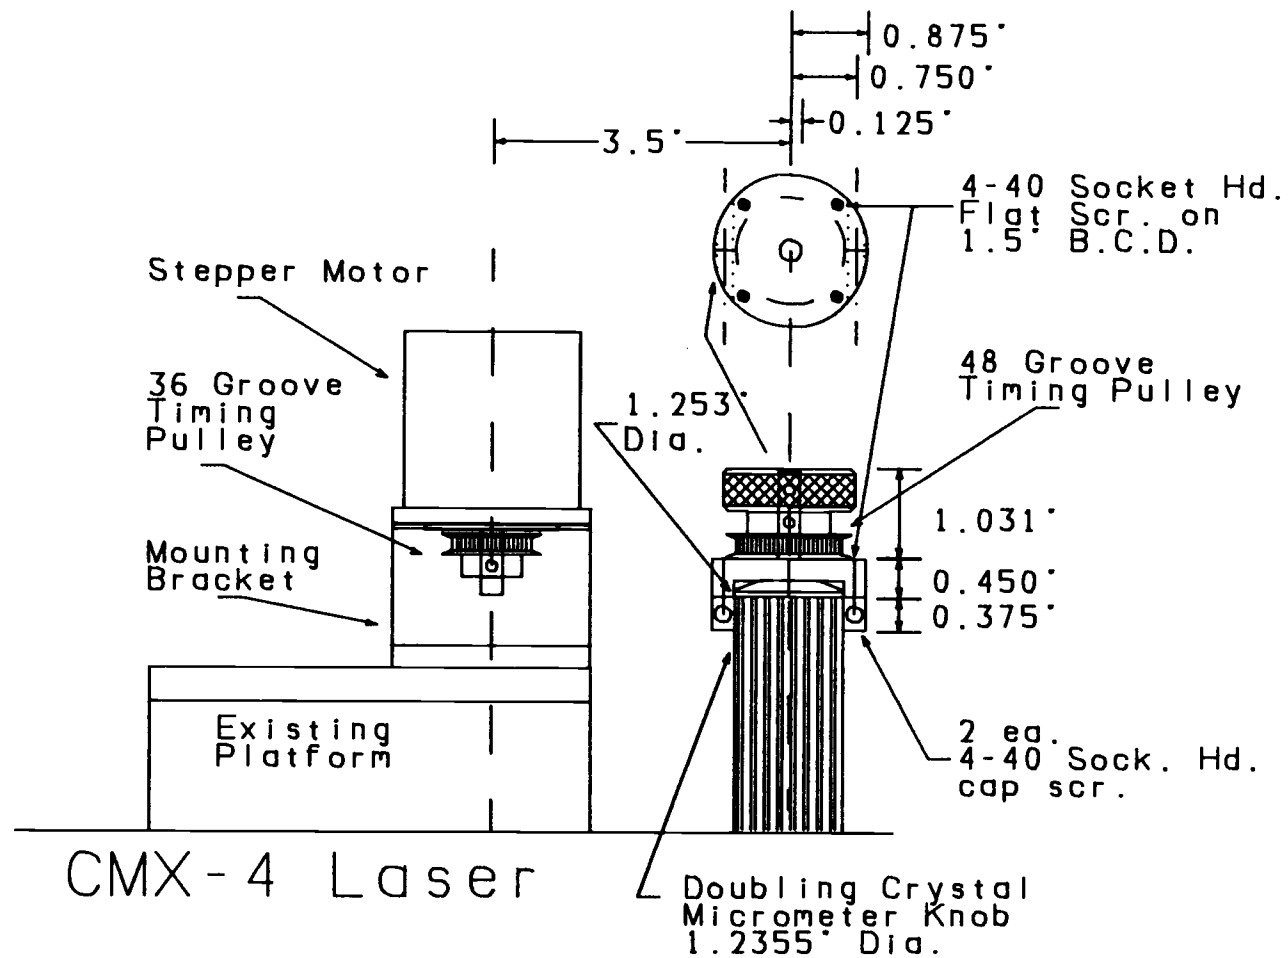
Side view of the ultraviolet doubling crystal stepper motor and the micrometer knob pulley and clamp.
